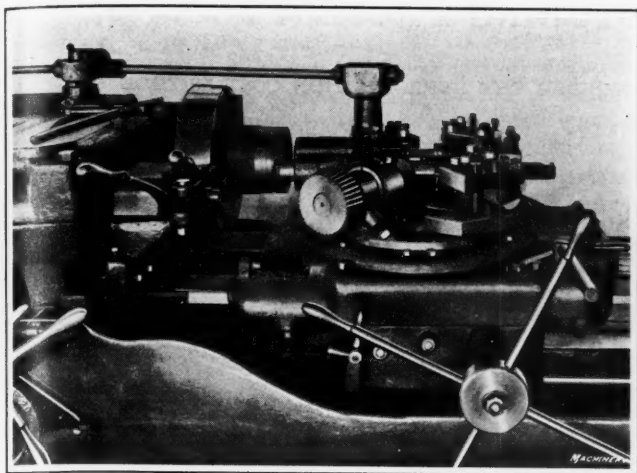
Thread-chasing Attachment shown in Fig. 14 cutting an External Thread
